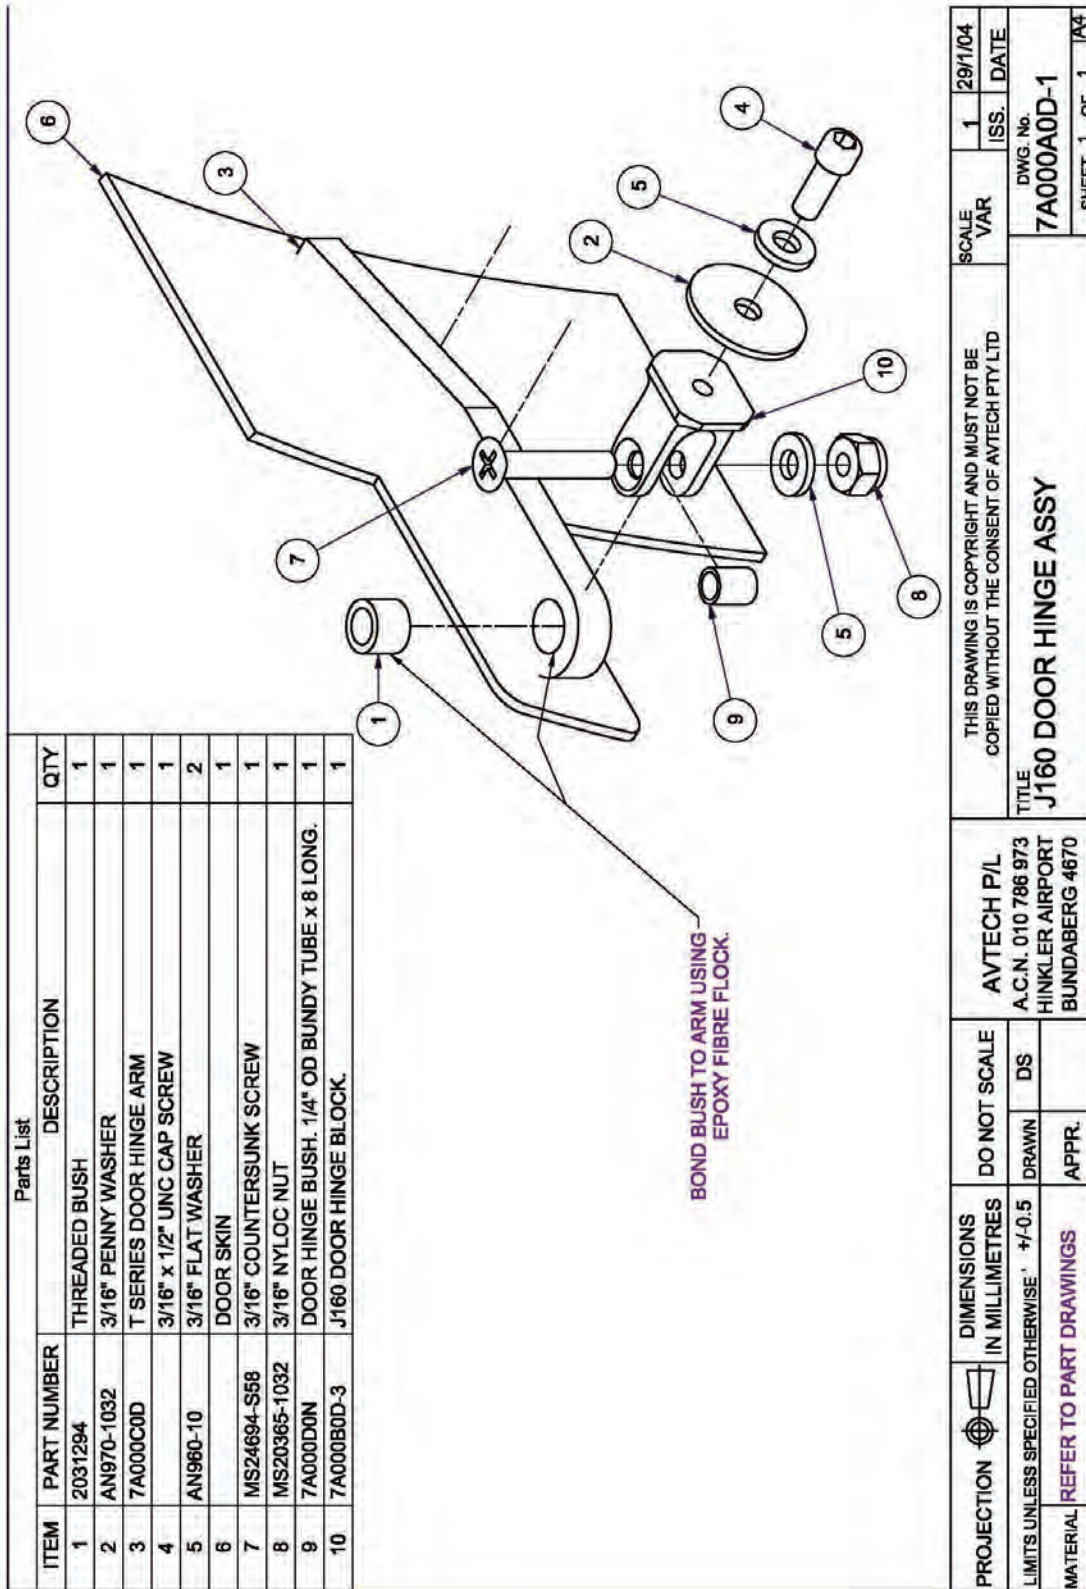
Door Hinge Assembly, J160/170/230/250
